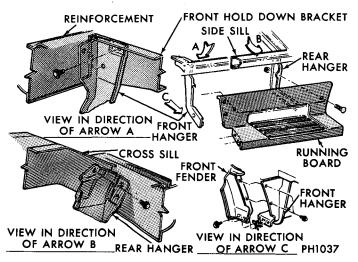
Running Board and Hangers (D-5,6,8, W6)
